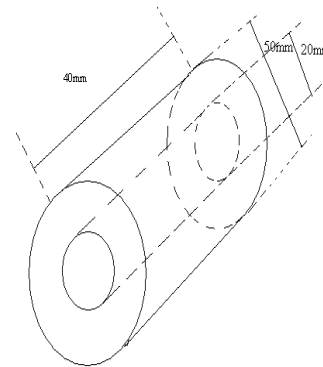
Design Specification of Rotor of Active Magnetic bearing.
